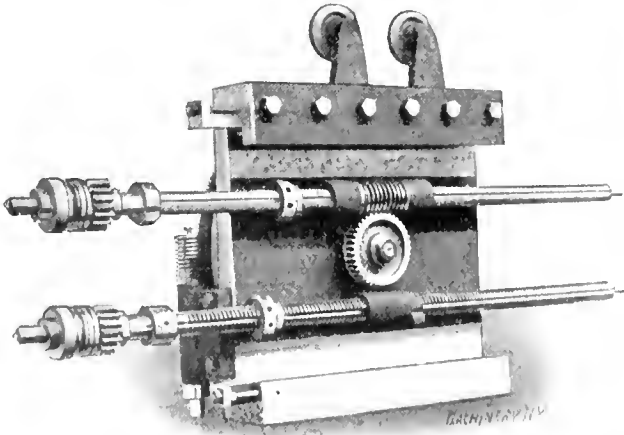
Rear View of Saddle for Swivel Head, showing Large Diameter of Rods and Screws and the Fine Adjusting Collars for the Tool Movements
